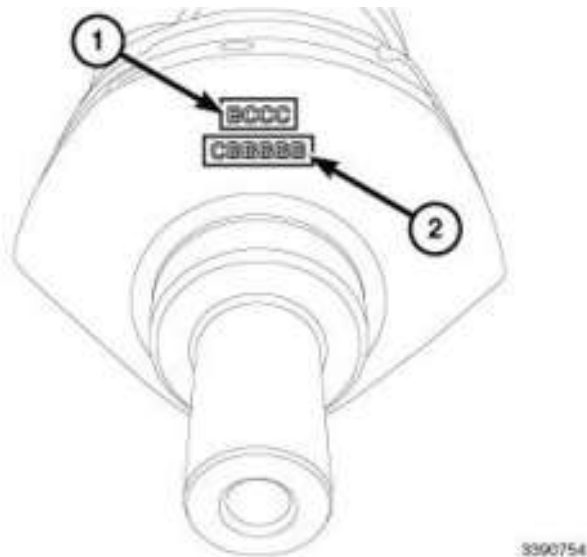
Bearing Identification & Letters Stamped Into Crankshaft
